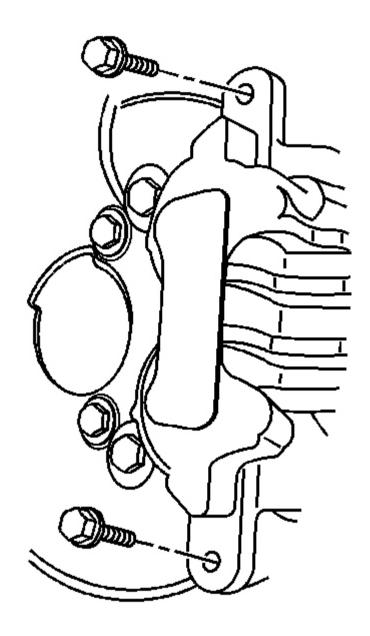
View Of Brake Caliper Bracket Courtesy of GENERAL MOTORS CORP.
